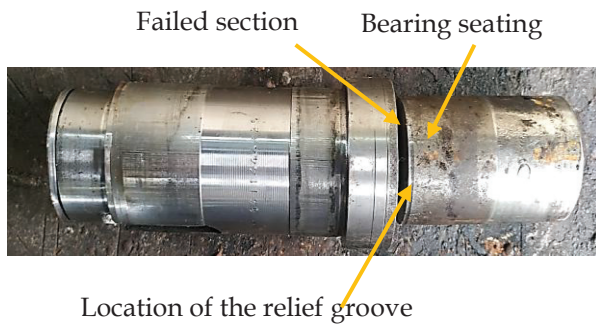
The failed section and the location of bearing seating on the failed shaft
